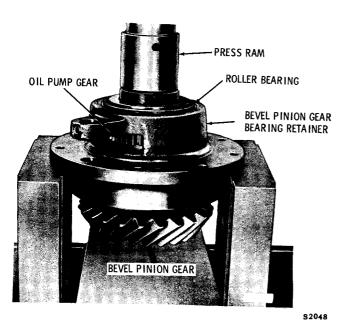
Removing bevel pinion gear from bearing retainer (VH, VSI series)
